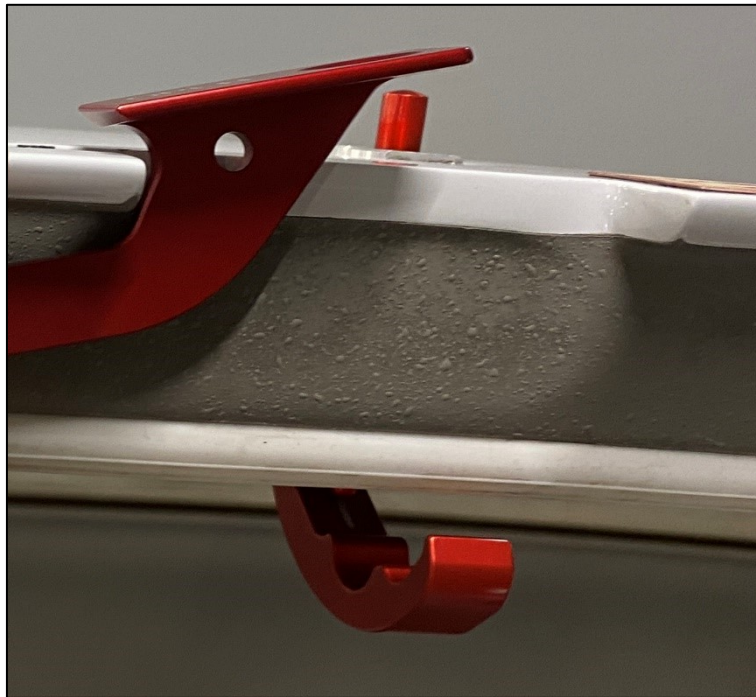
The external door handle in the position where the compression gas spring snaps the handle into the fully locked position. (Photo: SIAF)
